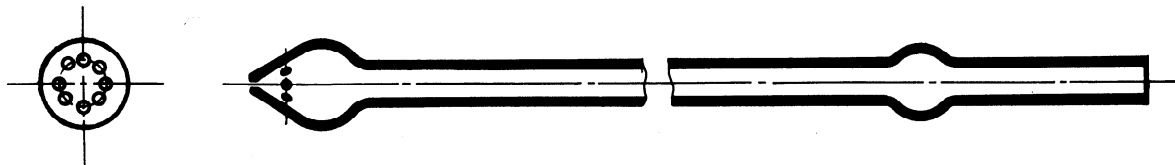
Bubbler tube B (4.3.2) (Diameter of holes : 0,05 mm)
